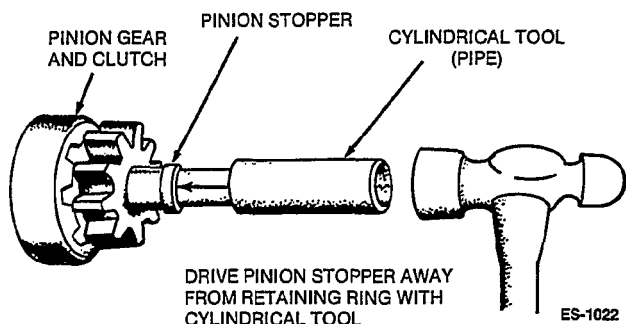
PINION GEAR AND CLUTCH REMOVAL
